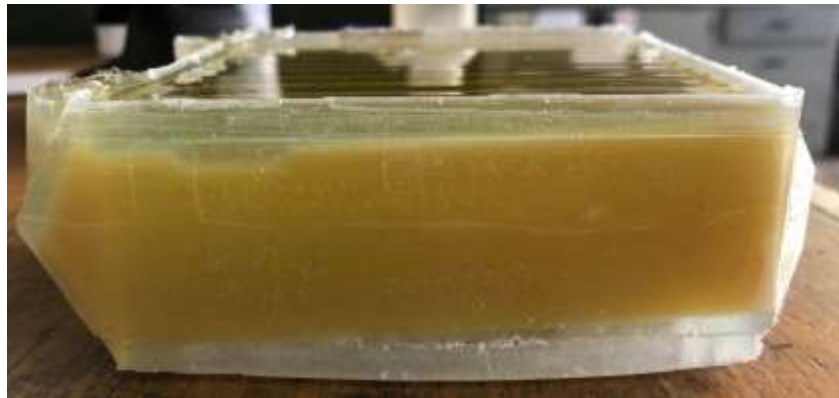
Successful trial of a heat exchanger fabrication after implementing aluminum fixture setup
